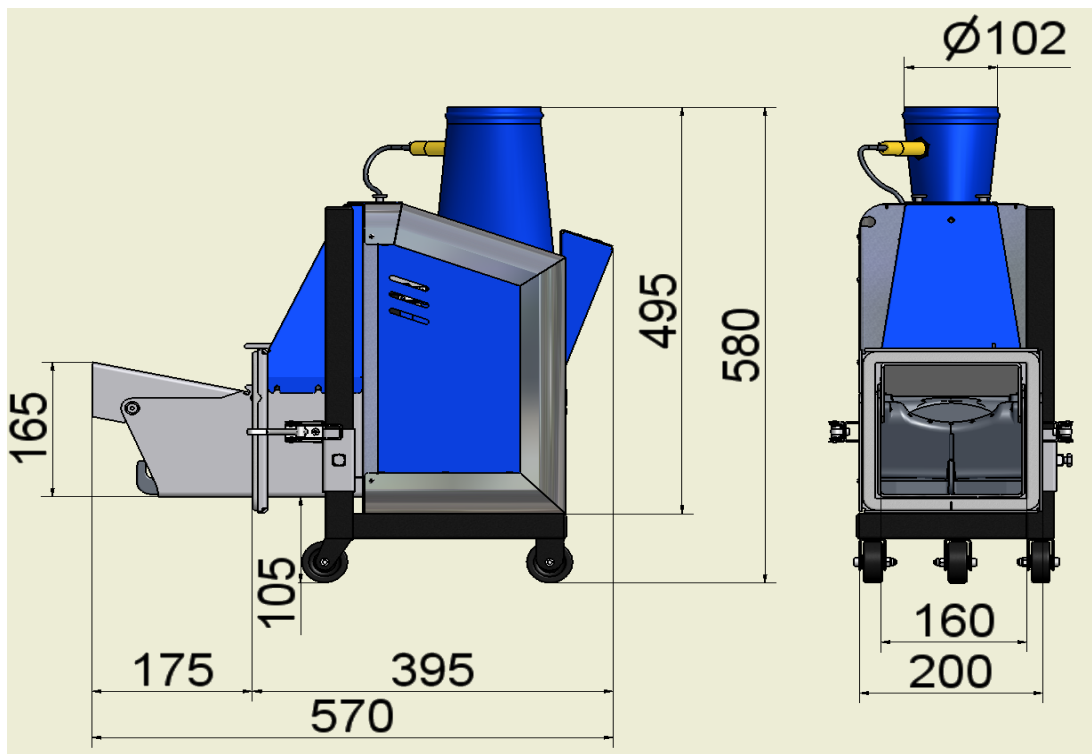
Dimensional drawing NH-burner (all measurements in mm)
